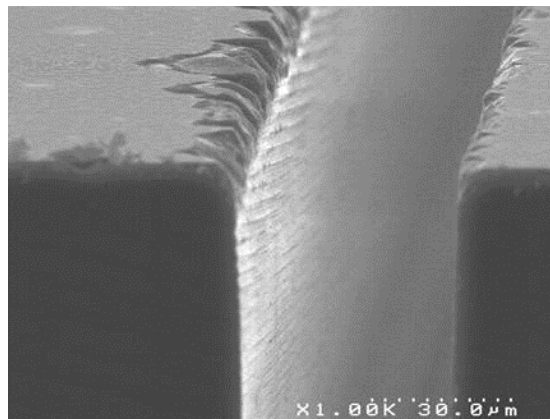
Die chipping caused by blade dicing on a silicon wafer.
